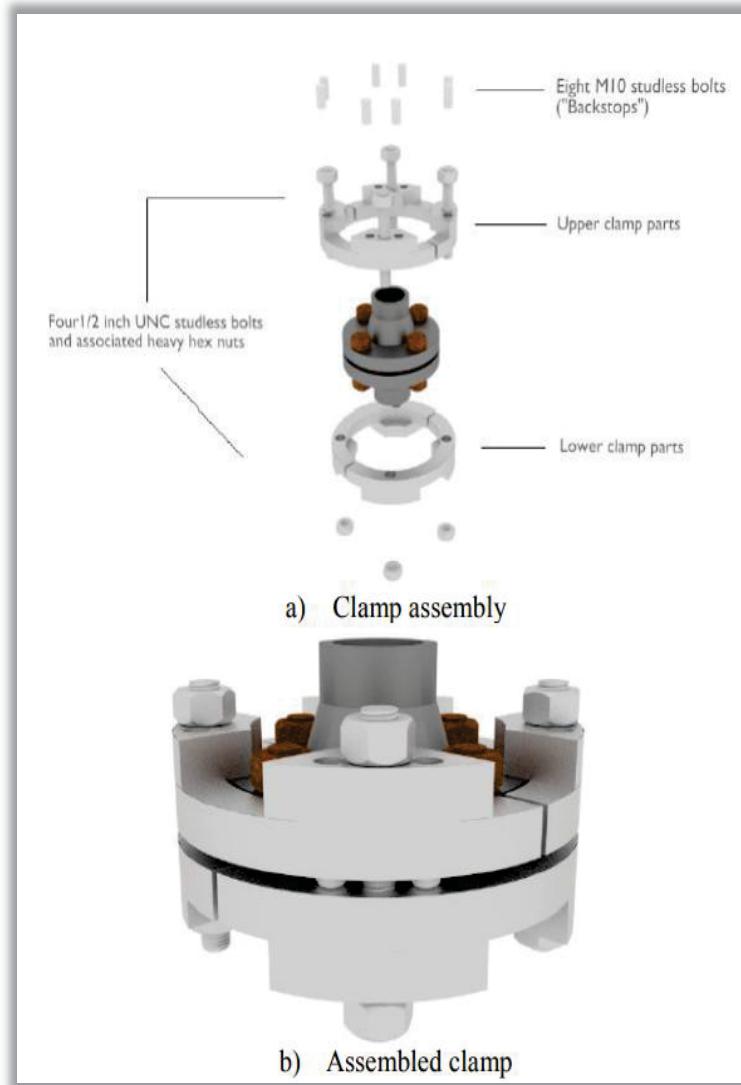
Hot bolting clamp™ from Irgens Engineering AS
